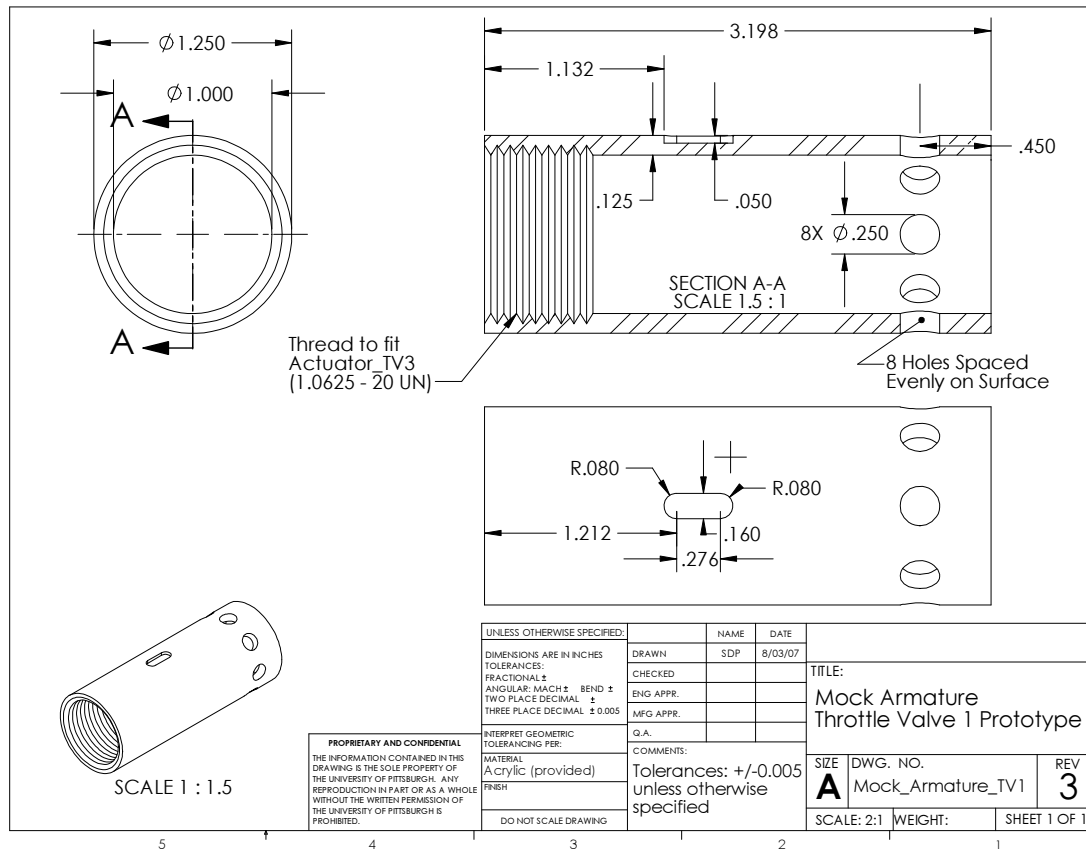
Mock armature component drawing for barrel valve prototype (TV1).
